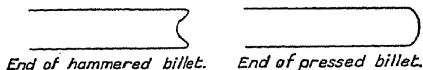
Showing Effect of Forging on the Ends of Forged Billets
